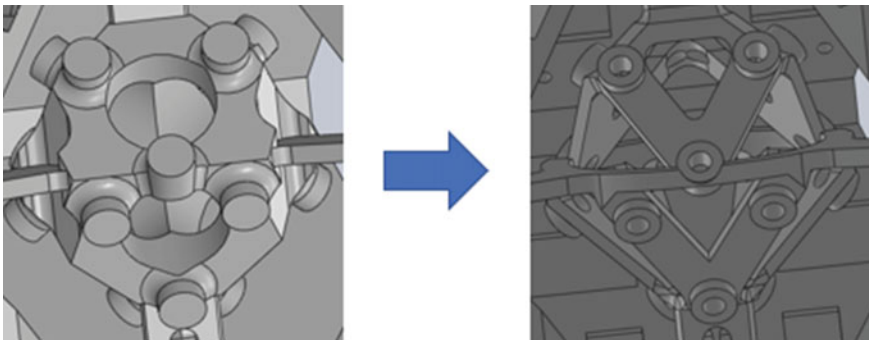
Modifications done at the centre stem which is the location for mounting accelerometers
